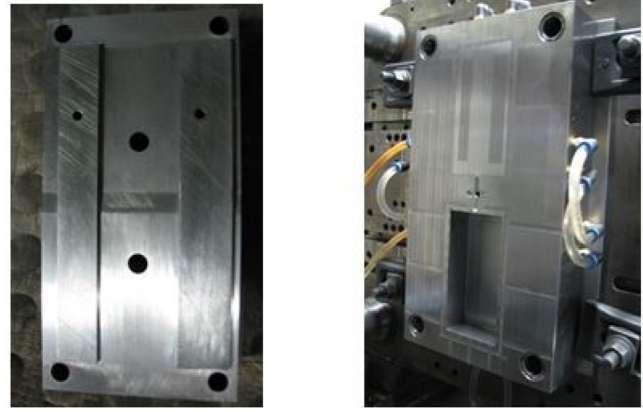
The mold and the injection molding machine used to form the polymer stress lattice parts.
